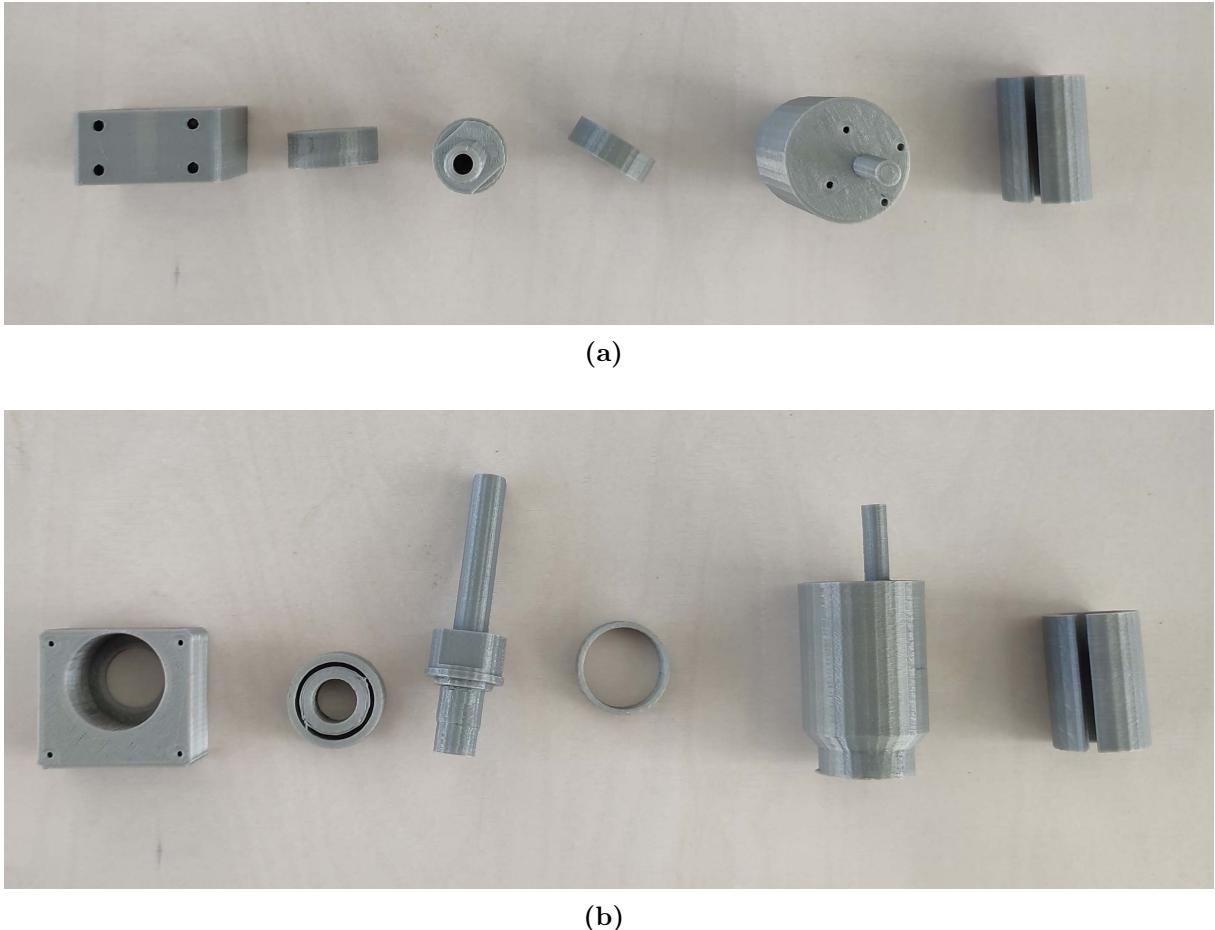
Exemplary 3D printed rocking objects (bearing box, bearing, axis, distance_tube, motor, plastic tube R20). Material: PLA silver, 2.85mm. Printer: Ultimaker 3 extended. Printer settings: fine
